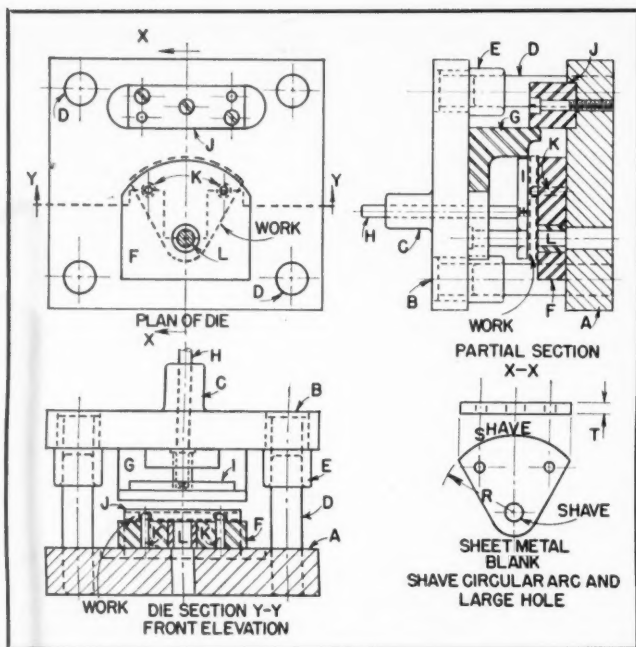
Illustration of a simple die for shaving a circular arc edge and one hole in a medium sized sheet metal blank.
